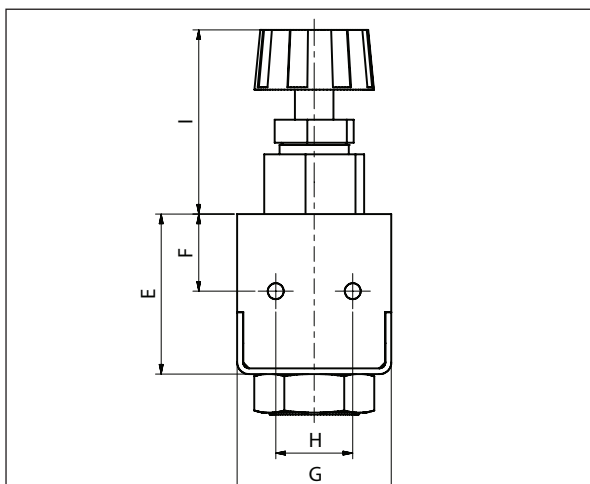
Head dimensions (with or w/o valve) with tapped holes for option /QB
